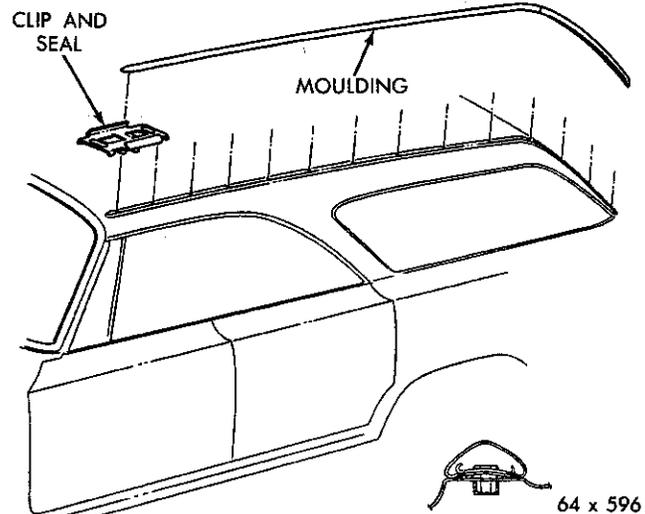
Roof Top Moulding Attachment (Town and Country)
